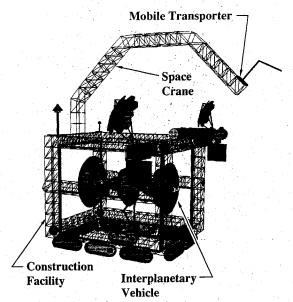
Interplanetary spacecraft assembly using the mobile transporter and space crane.
